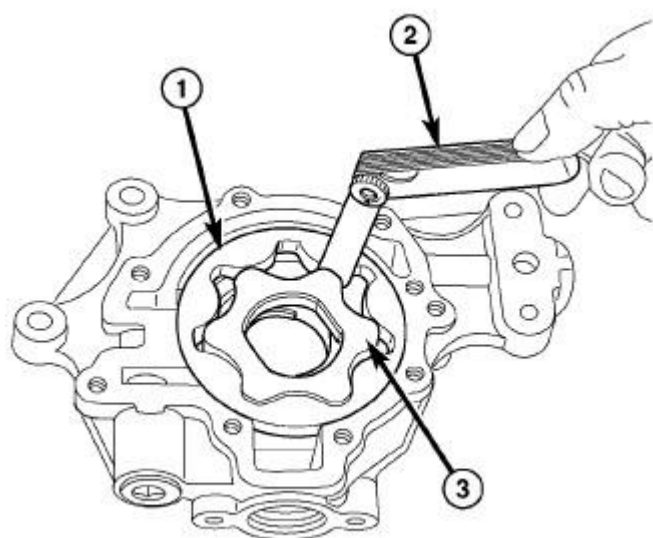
MEASURING CLEARANCE BETWEEN ROTORS
